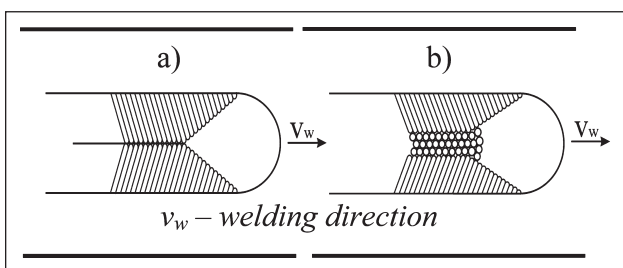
Weld pool solidification mode: a) epitaxial and b) equiaxial
